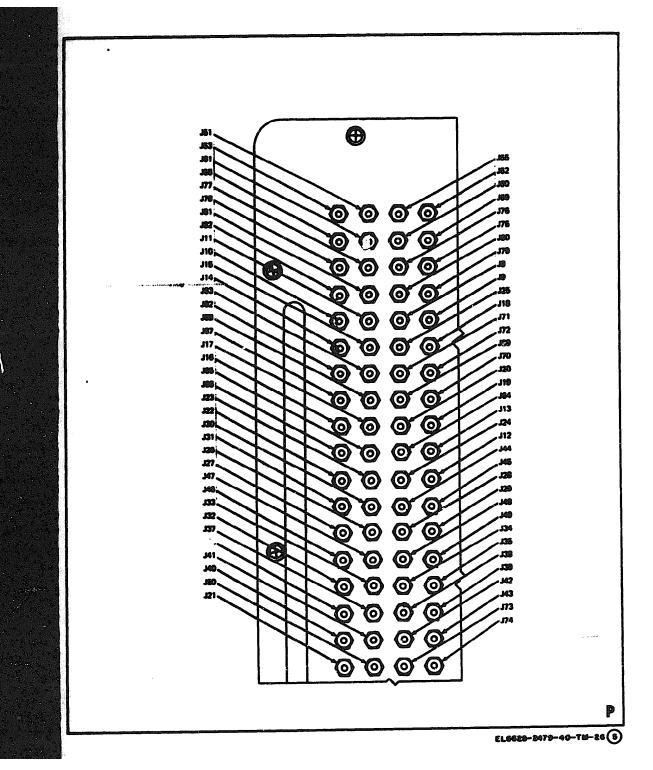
1 . Panel assembly 1A3, parts location (part 5 of 5).
